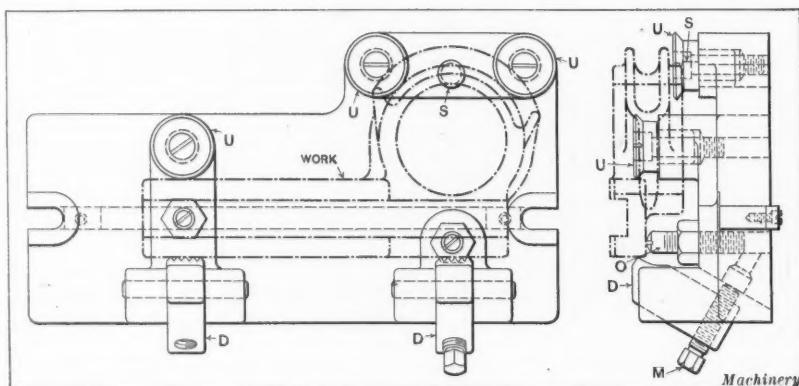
View of Fixture shown in Fig. 4, with Work in Place
